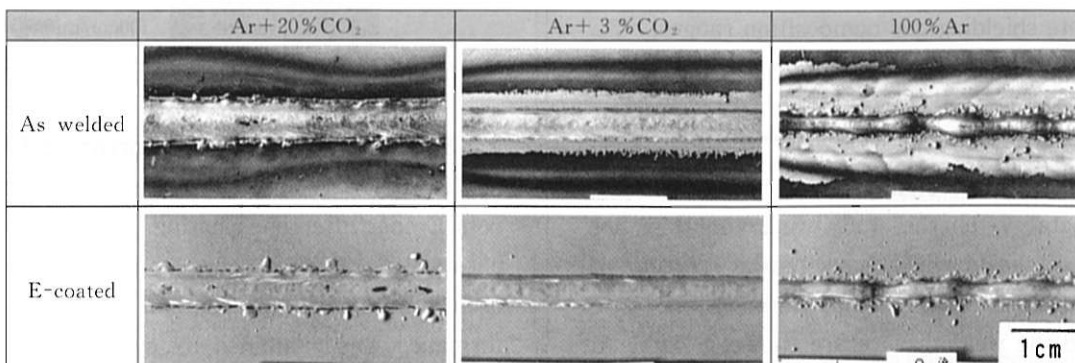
Appearance of welds by various composition of shielding gas
